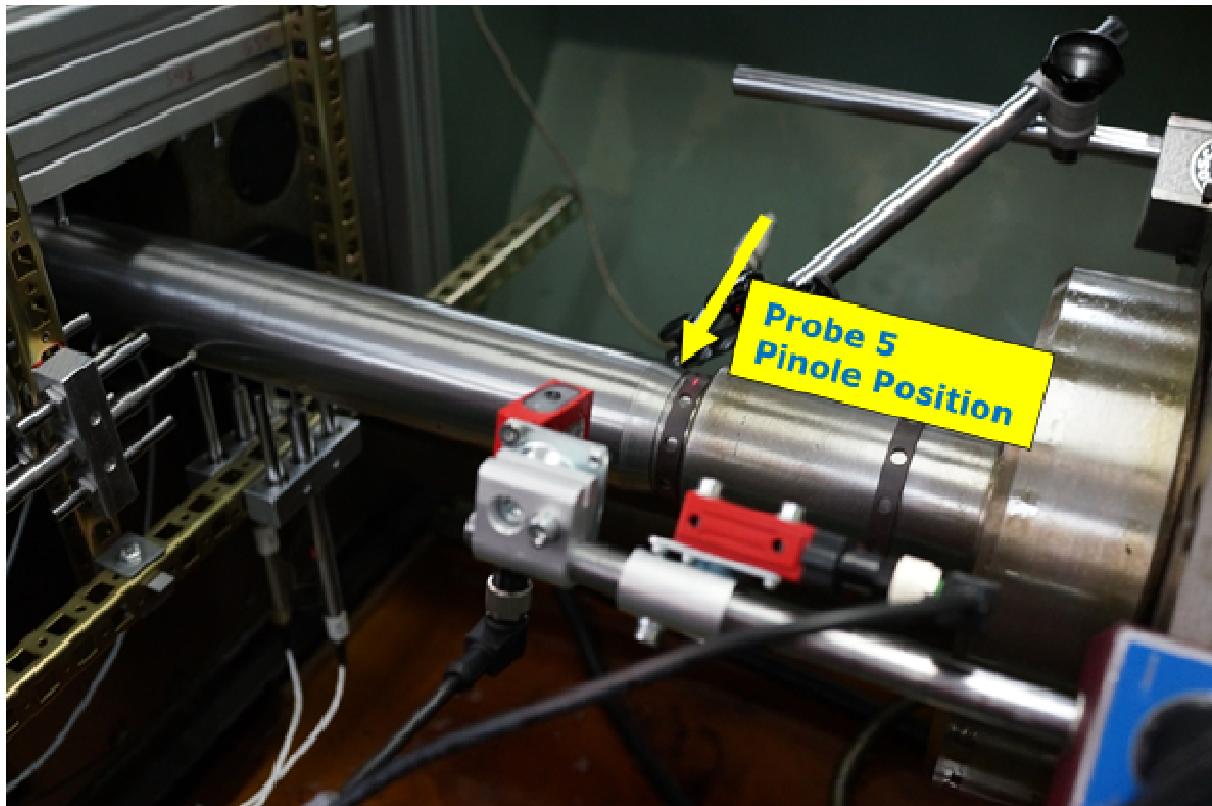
Experimental Set-Up – Workpiece Eccentricity at Pinole Position
